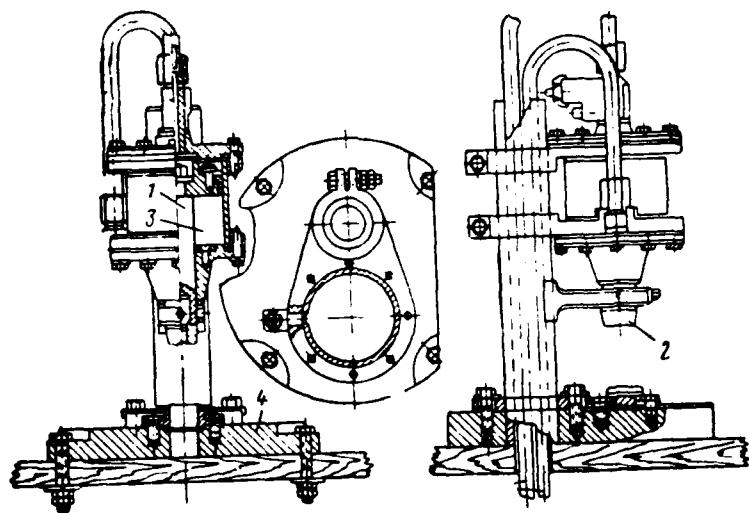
Bench pneumatic press: 1 - stock/rod; 2 - socket; 3 - cylinder; 4 - base/root.
